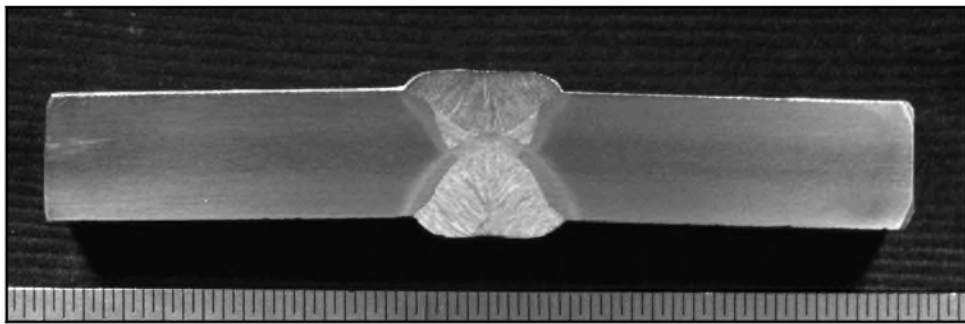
Cross girth weld section taken from the ~39° location on the pipe. The failed joint side is on the left.
